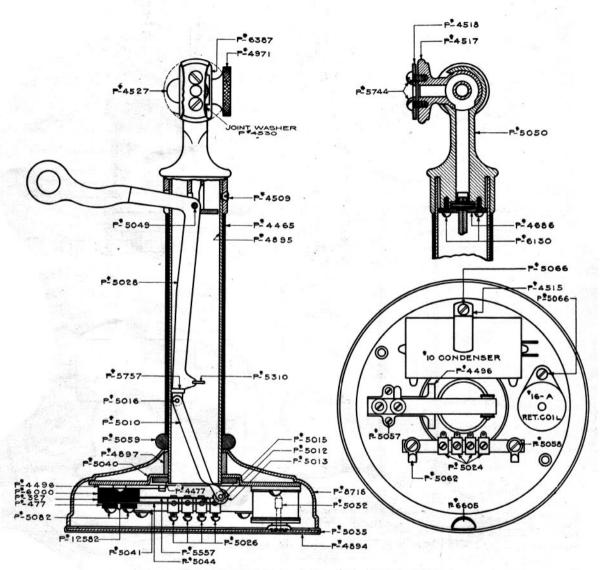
Old Type Nos. 28 and 39 Desk Stand
